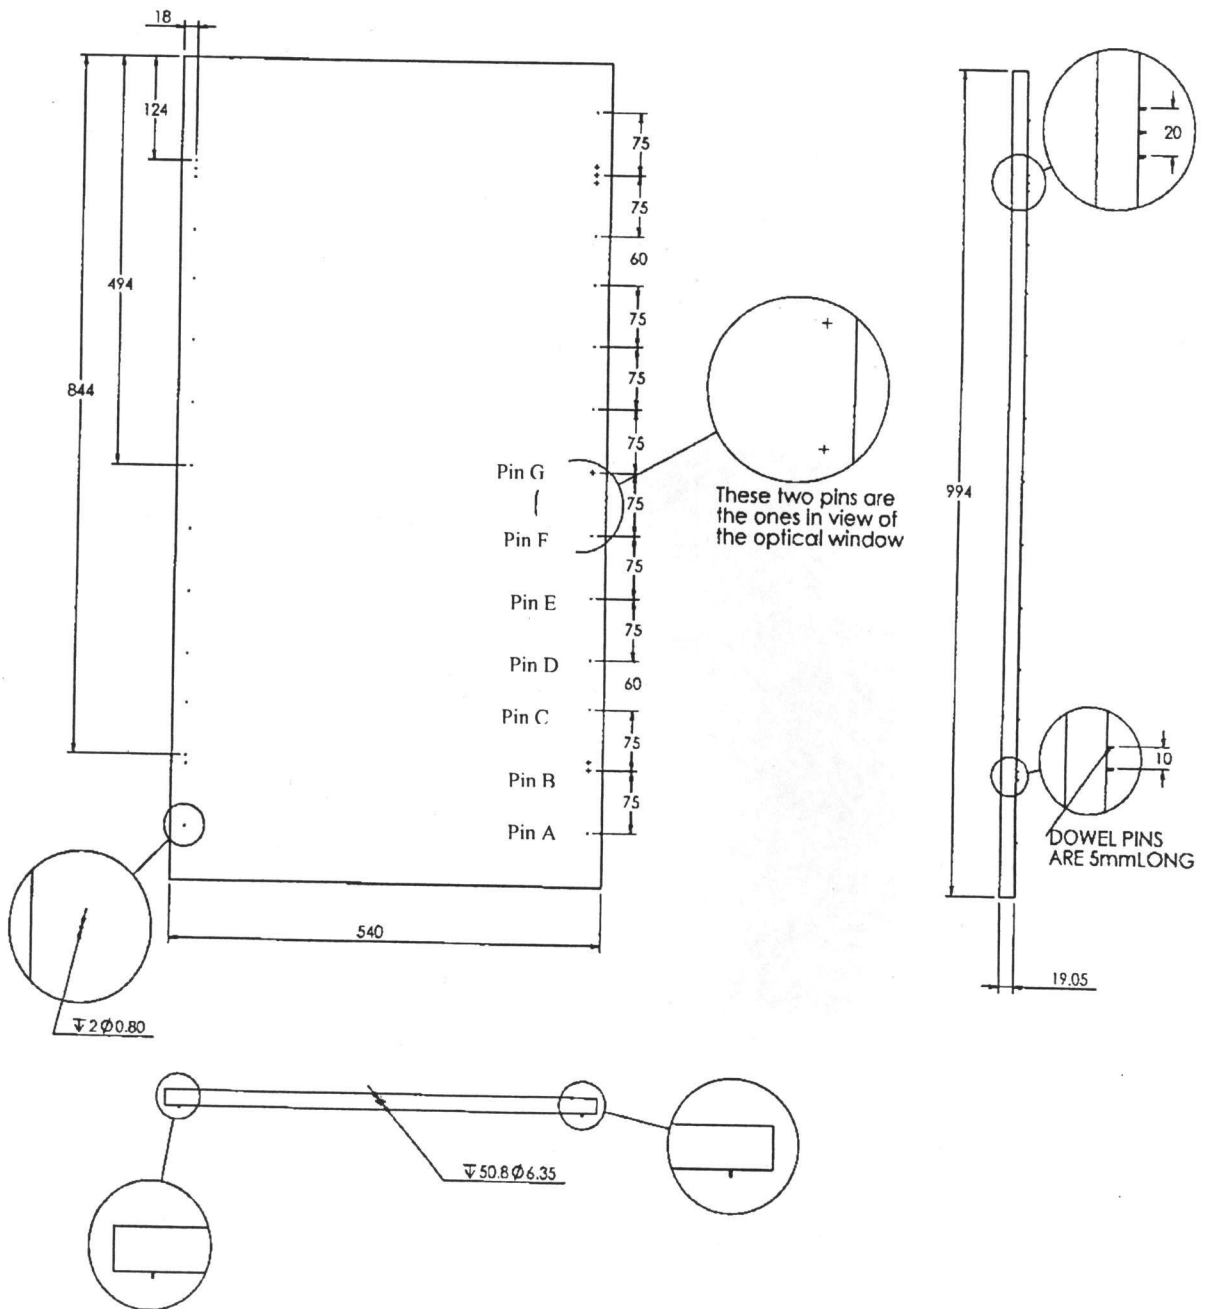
Plate drawings with the locating pins on it. All dimensions are in millimeters.
